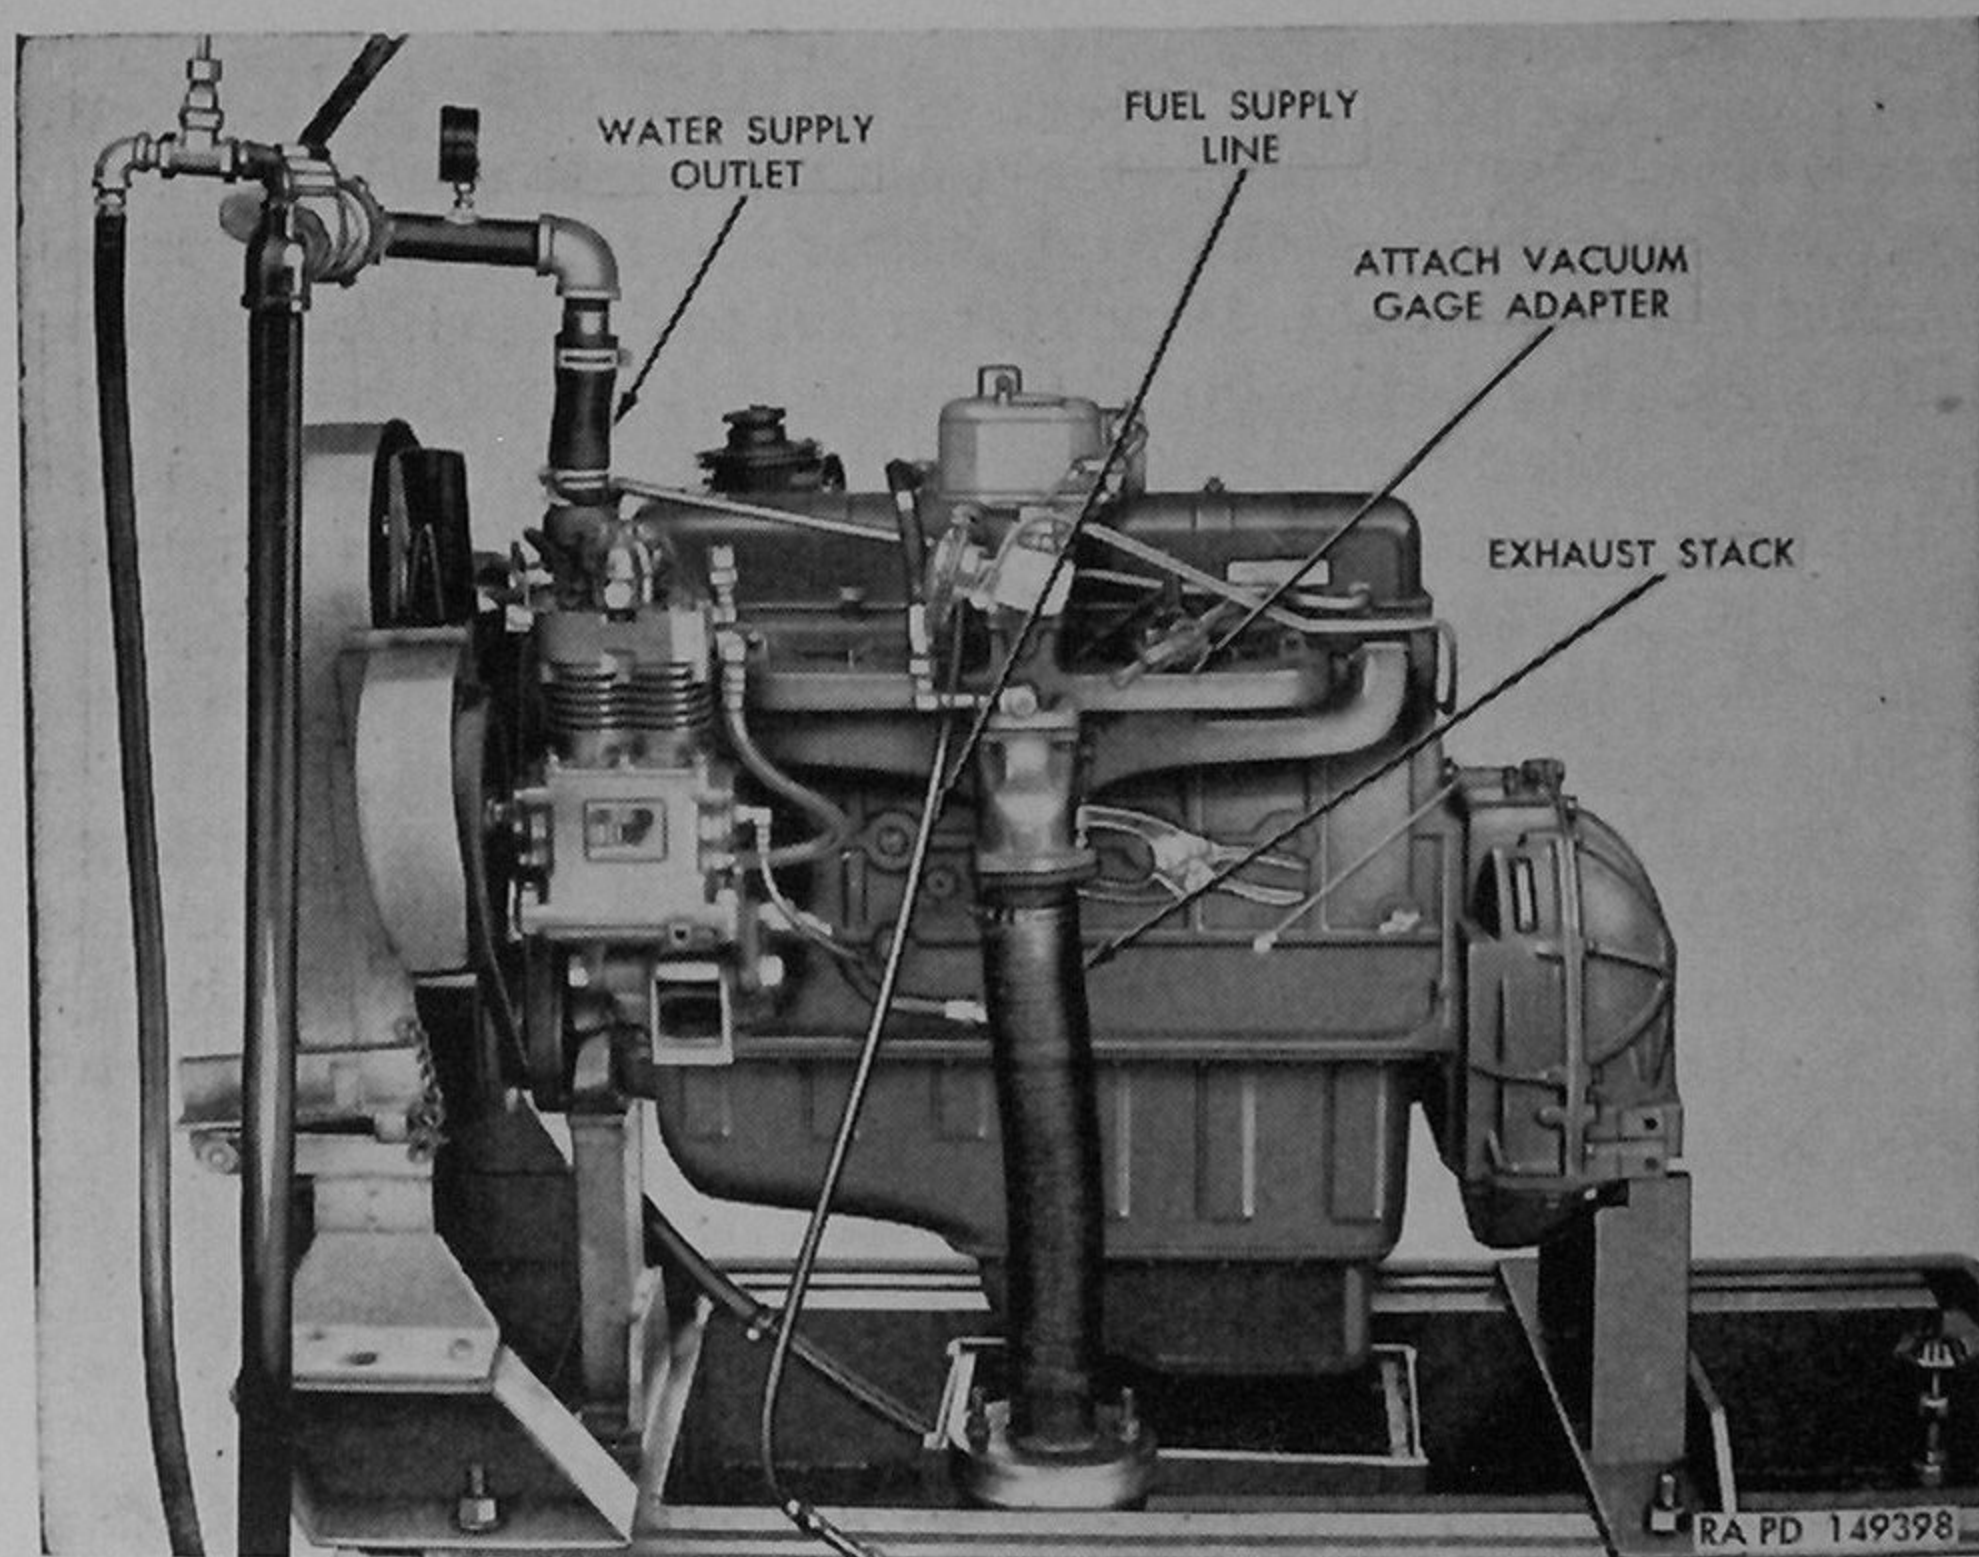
Engine assembly 7411599 in typical test stand (left side view).
